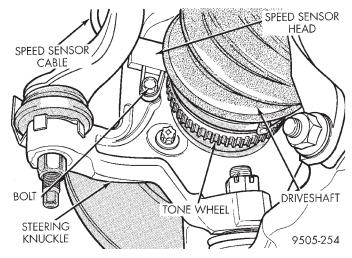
Speed Sensor Head Attachment To Steering Knuckle
